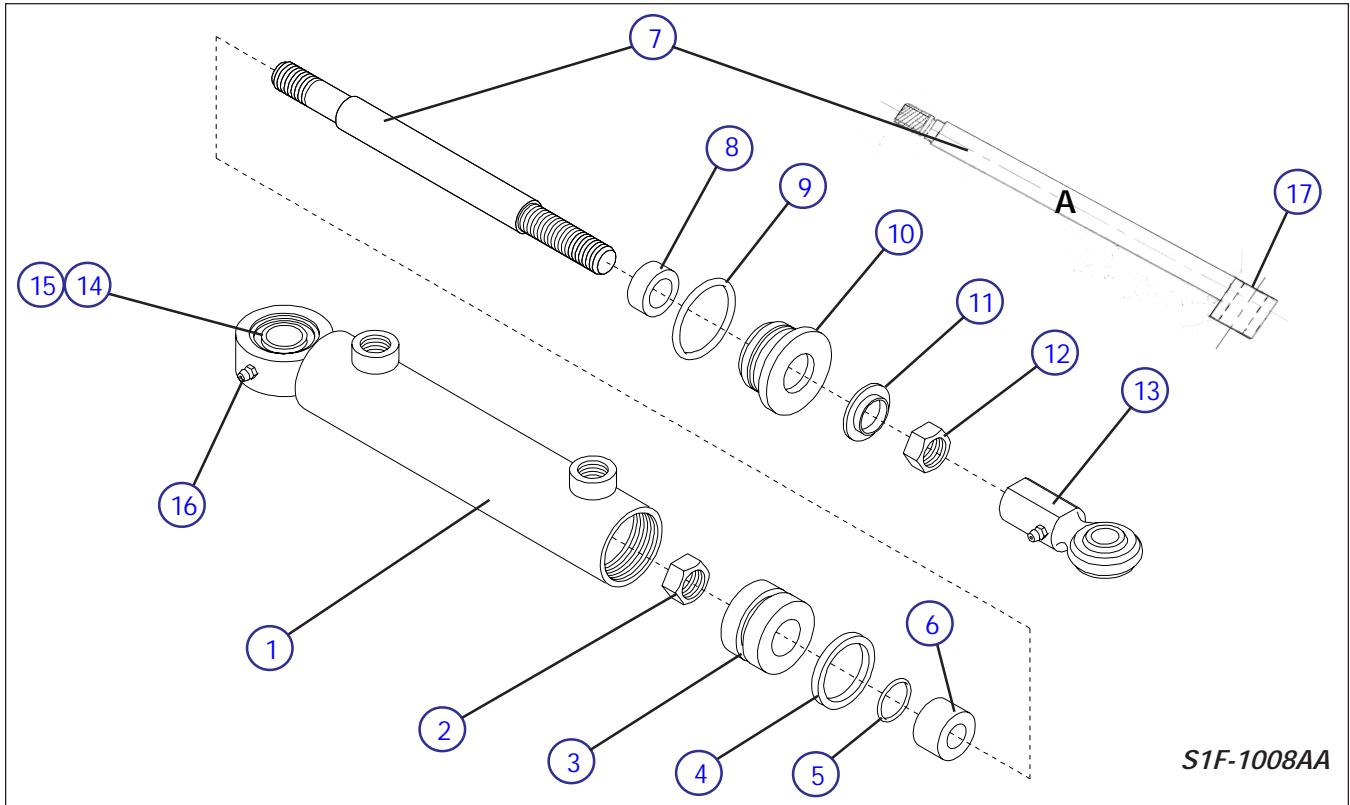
, Rear Axle Assembly, Flat Mount (Continued)
